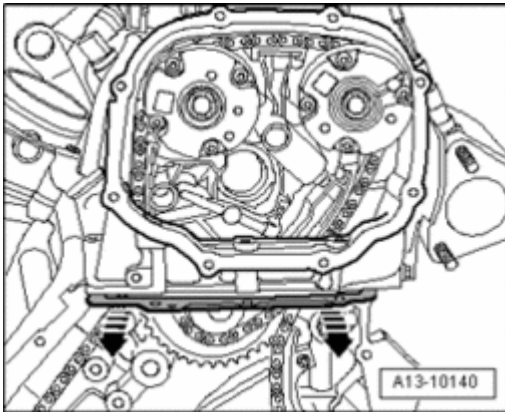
Bending Ends Of Cylinder Head Gaskets Very Slightly Downward Until Upper Sealing Surface Of Gasket And Cylinder Head Can Be Cleaned
